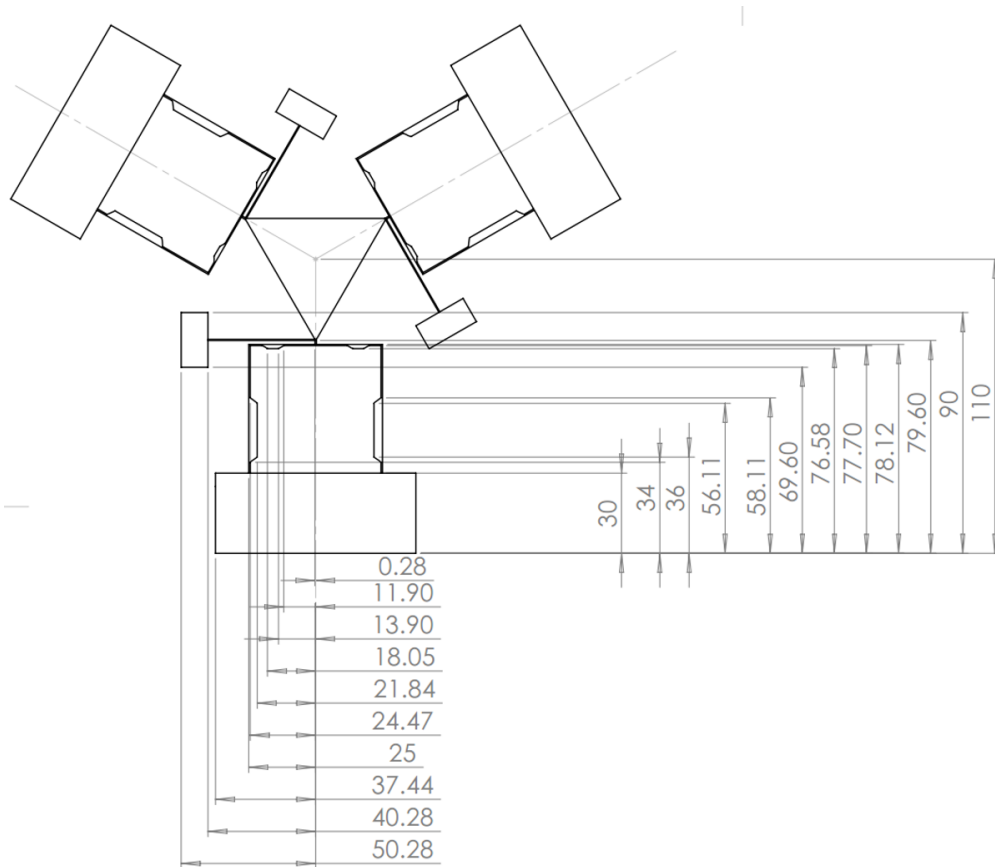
The 2D CAD drawing for the synthesized optimal $X - Y - \theta_z$ FPM. The units for all the dimensions are in millimeters and the thickness of the joint is 20 mm.
